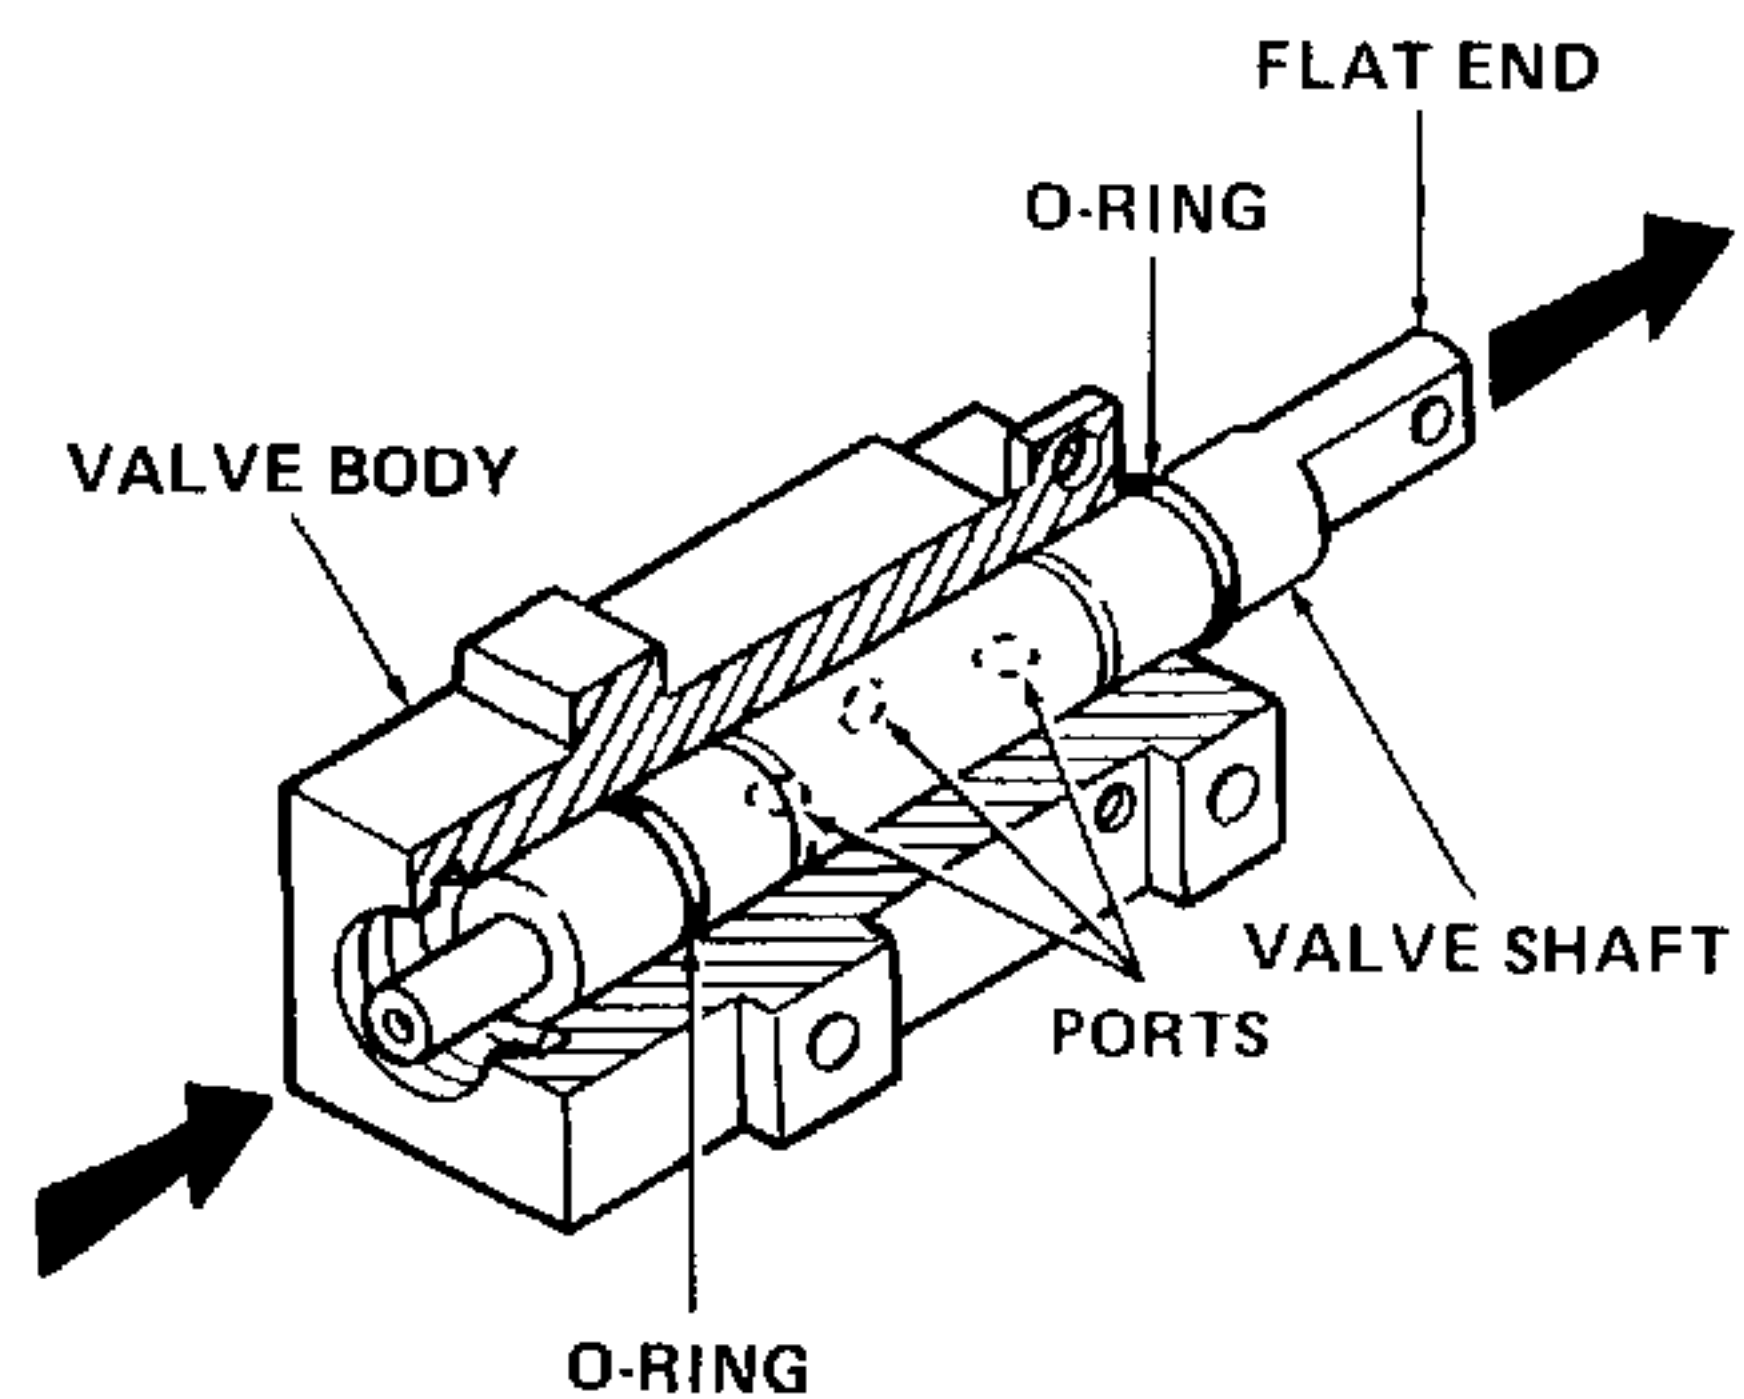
O-Rings Correctly Installed on Valve Shaft.
